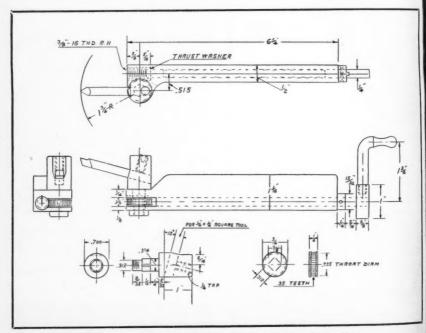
Drawing of Adjustable Radius Turning Lathe Tool
